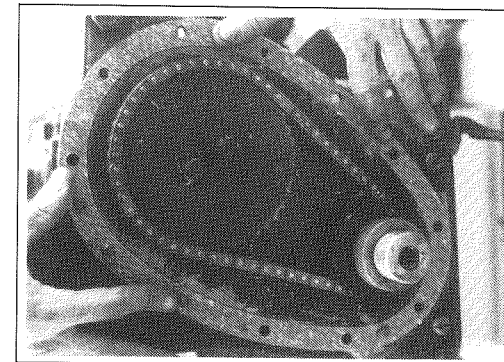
Ensure that all traces of the old gasket are removed then fit a new one. Refit the oil thrower and oil seal sleeve.
